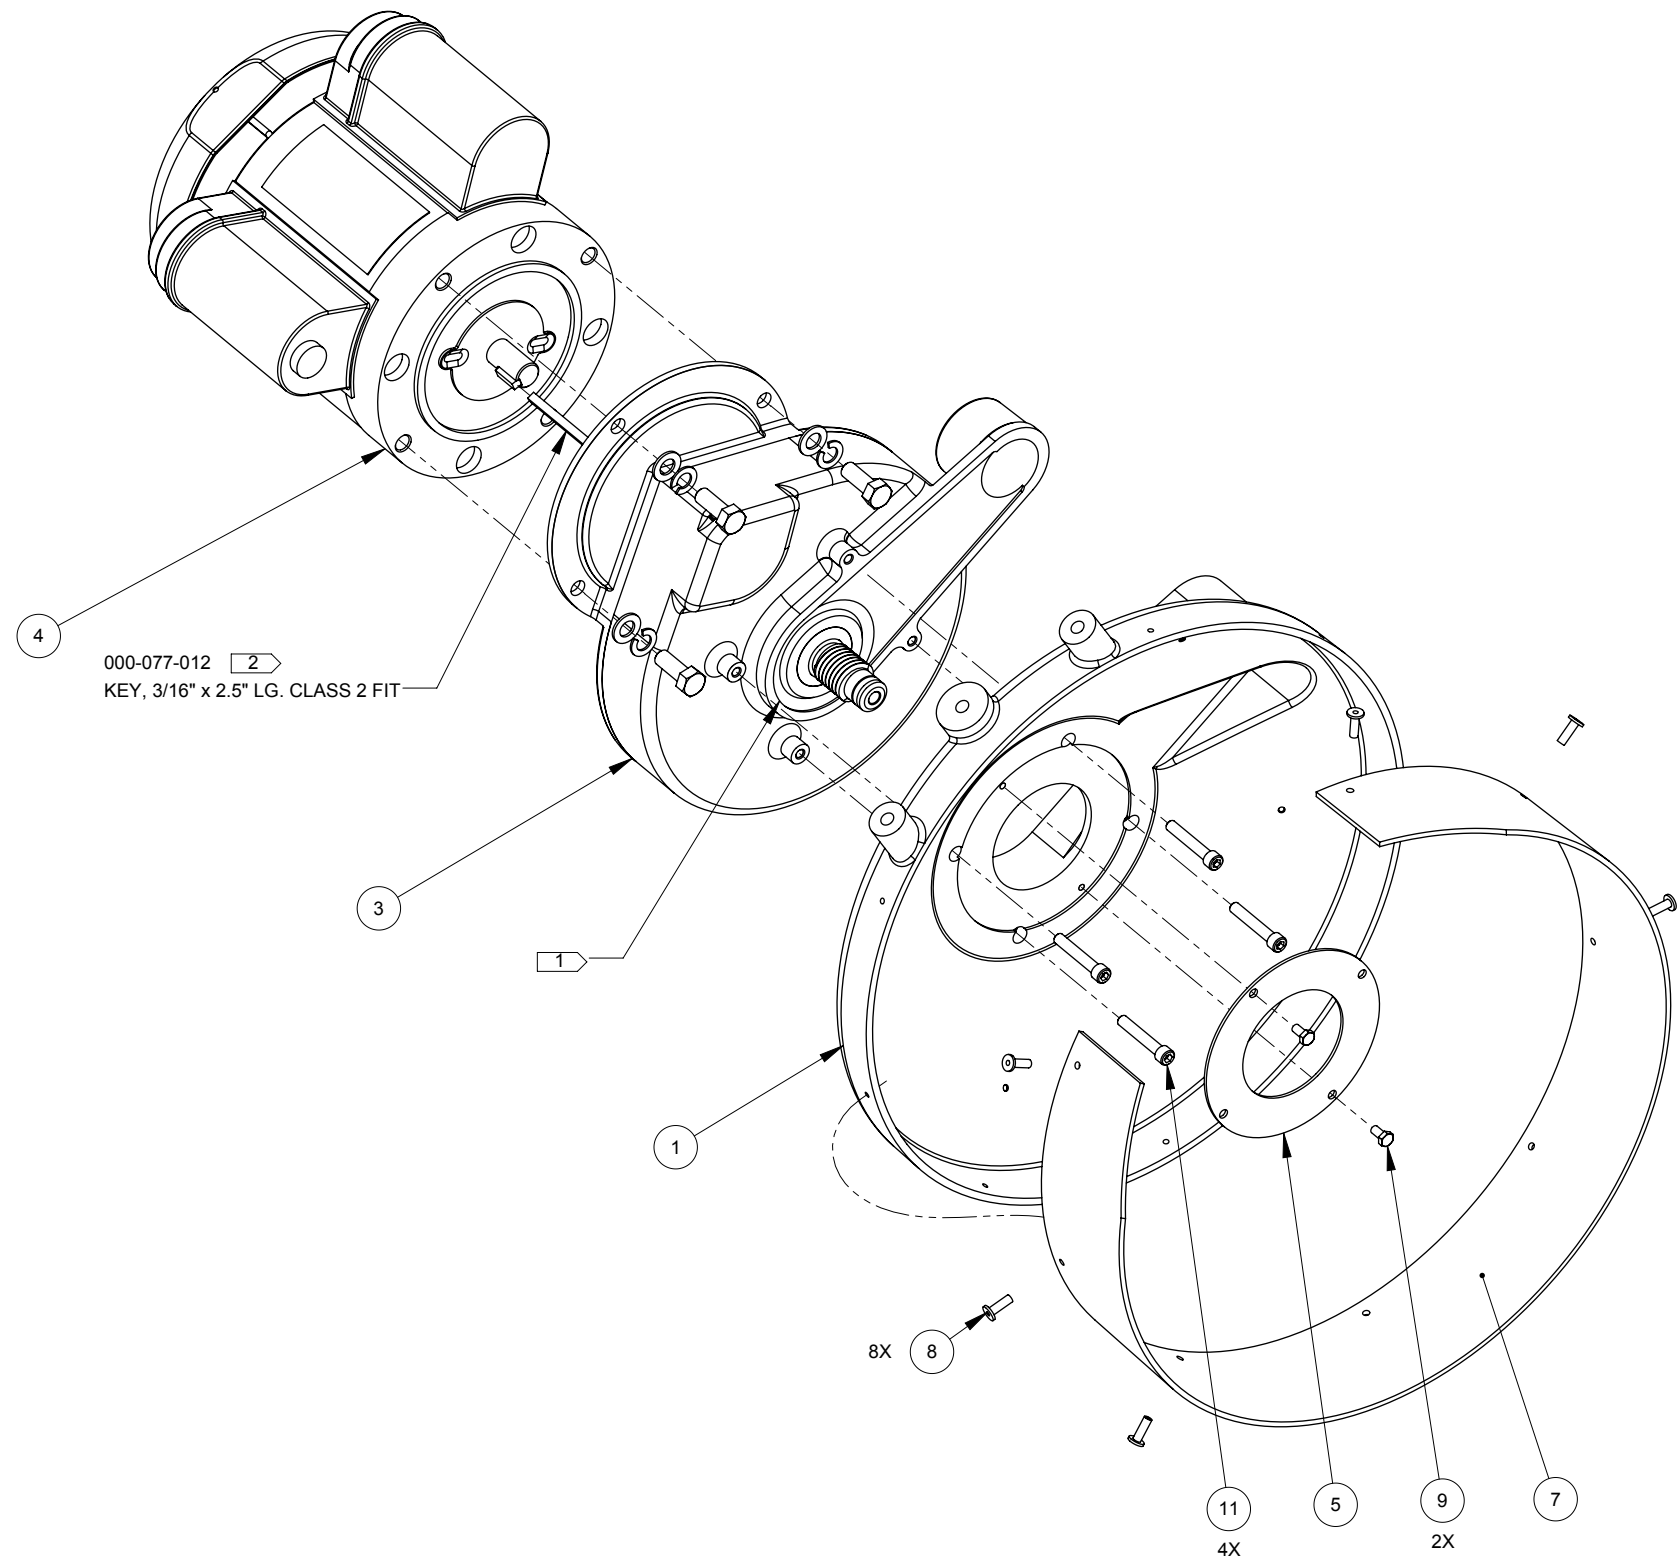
Base and Drive Train Assembly - View 2 of 2
